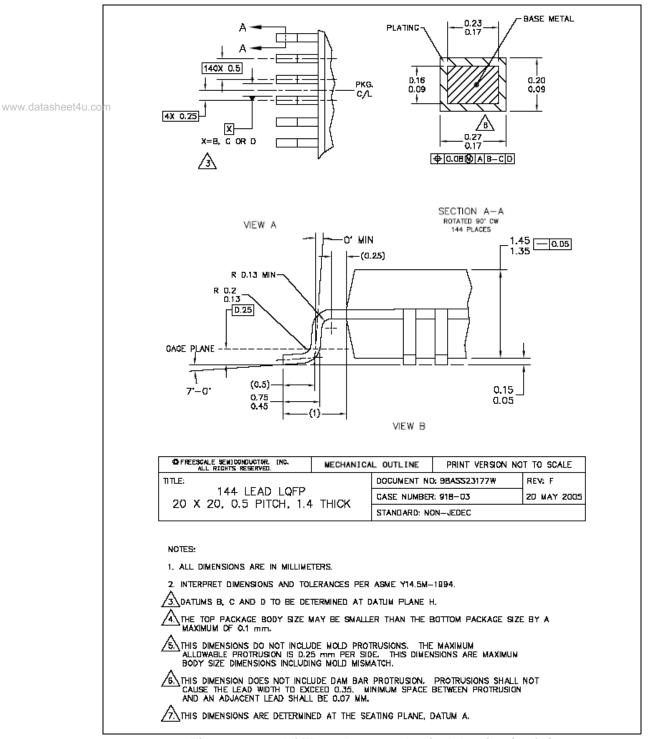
144 LQFP package mechanical drawing (1 of 2)
